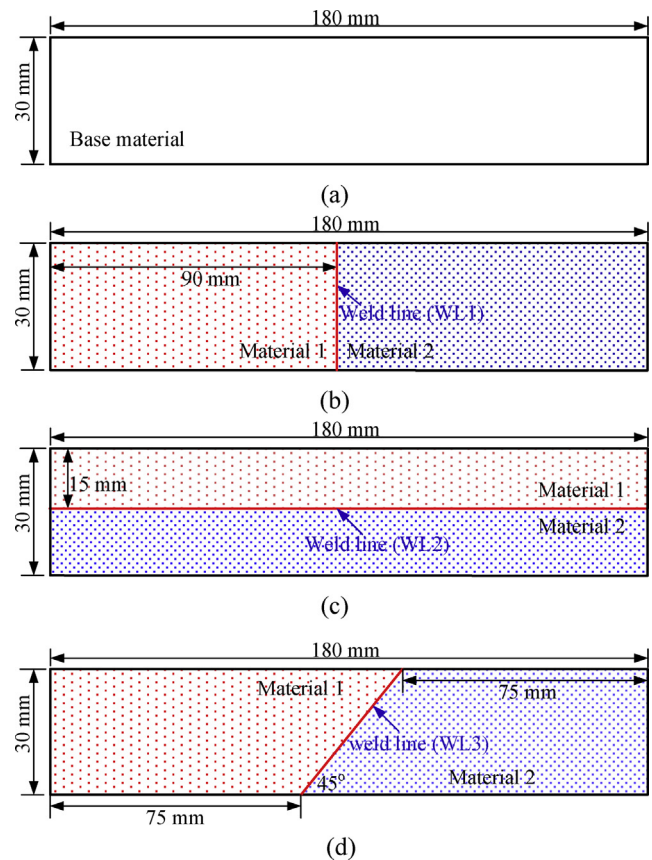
Schematic configurations of base materials and TWBs specimens with three different weld orientations.
